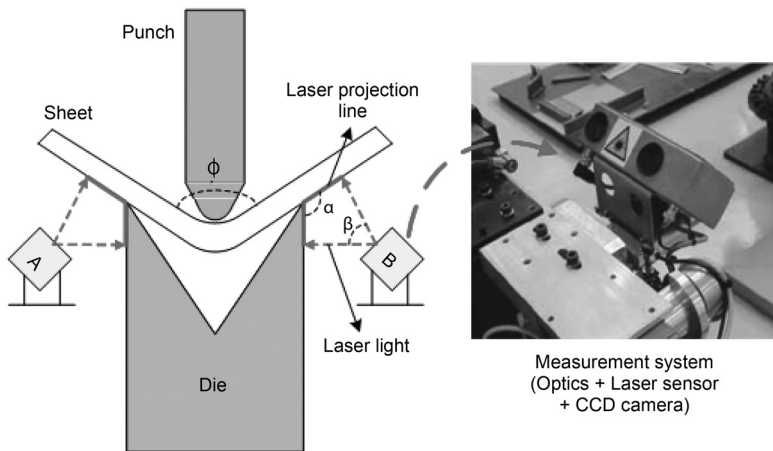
Schematic of bending angle measurement using the COPRA LaserCheck (data M Corp.). CCD, charge-coupled device. Source: Ref 2.32
